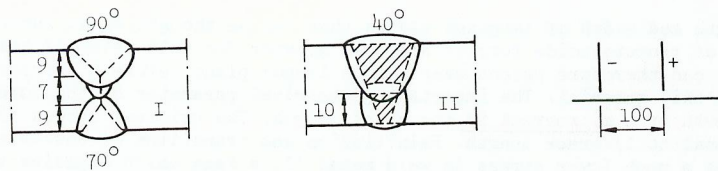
Joint dimensions for Weld metals I and II.
